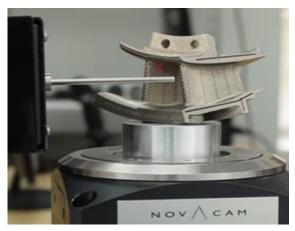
Novacam rotational scanner spins a smalldiameter probe as it acquires the inside surface of a stator blade. The ID, including its cooling holes, is acquired as a dense spiral of 3D points.
